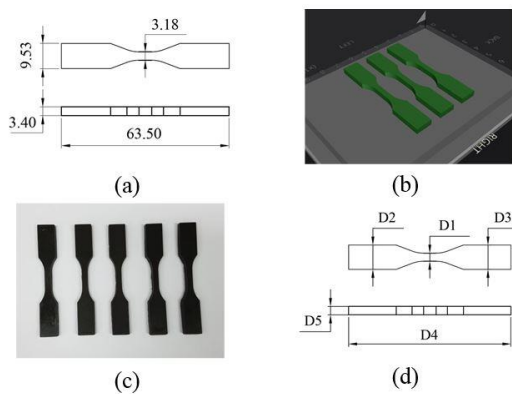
(a) Test specimen of ASTM D638-V, (b) 3D modeling for printing process, (c) printed specimen according to the ASTM, and (d) the measurement point (D1–D5) for dimensional accuracy
